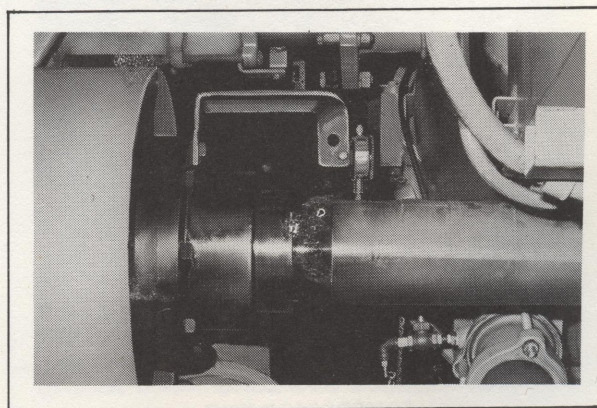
INDICATOR MOUNTED ON ENGINE COUPLING.
